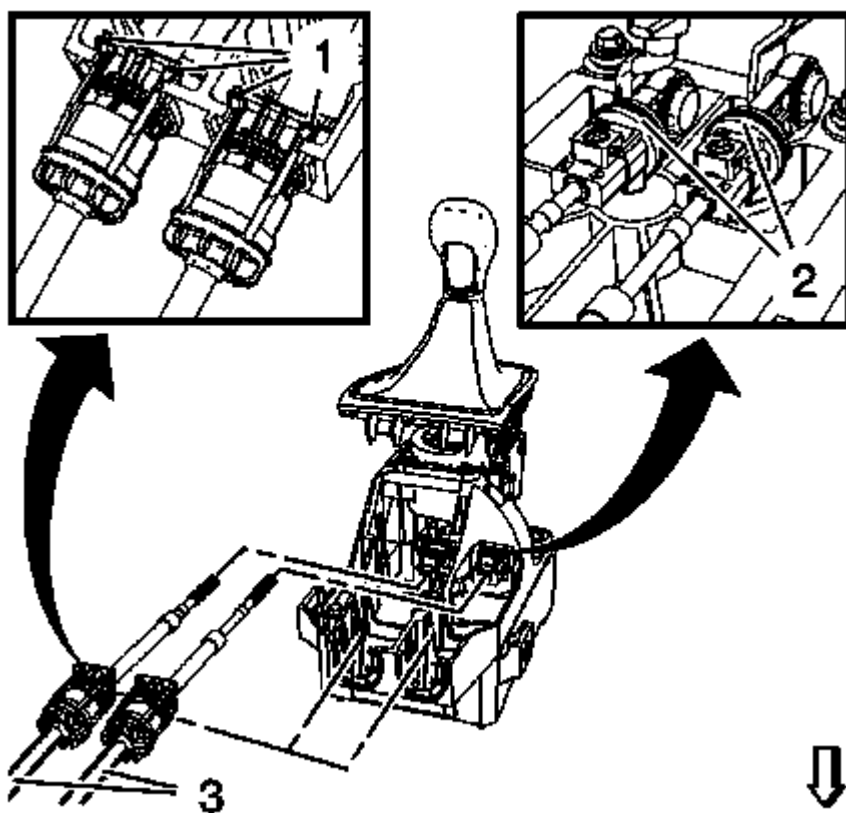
Selector Lever Cable, Adjust Locks And Transmission Control Lever Housing
